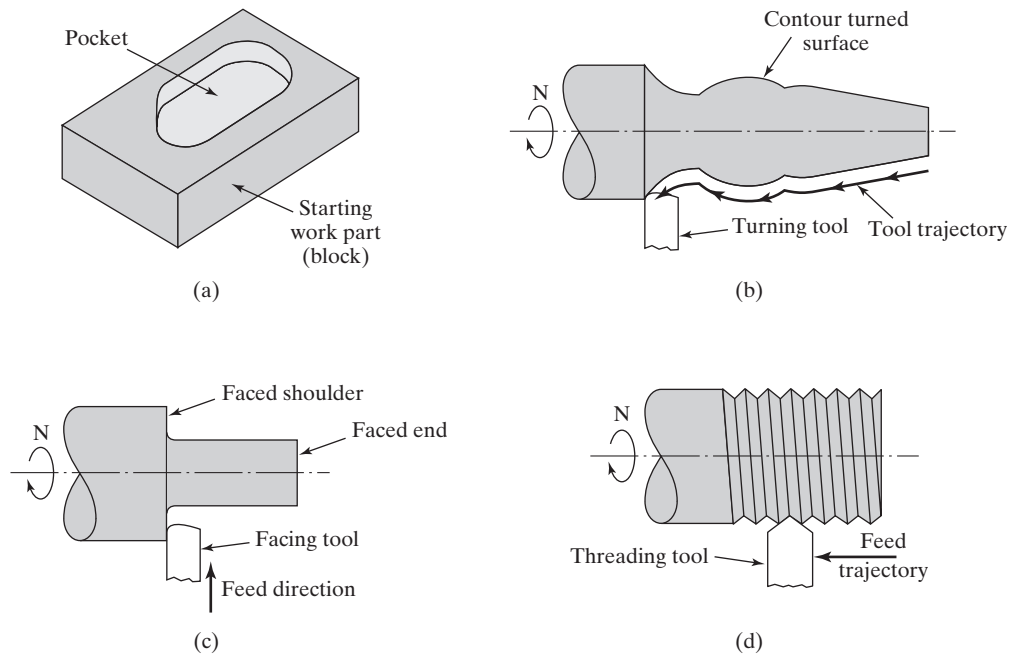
Examples of machining cycles available in automatic programming modules. (a) pocket milling, (b) contour turning, (c) facing and shoulder facing, and (d) threading (external).
